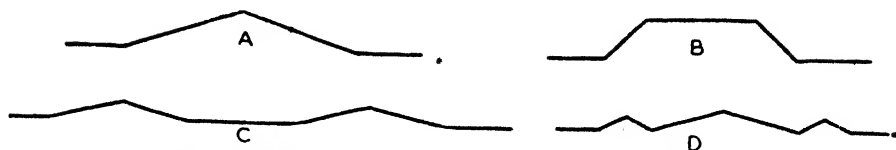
EXAMPLES OF MOULDING PRODUCED IN A CRAMP FOLDER
